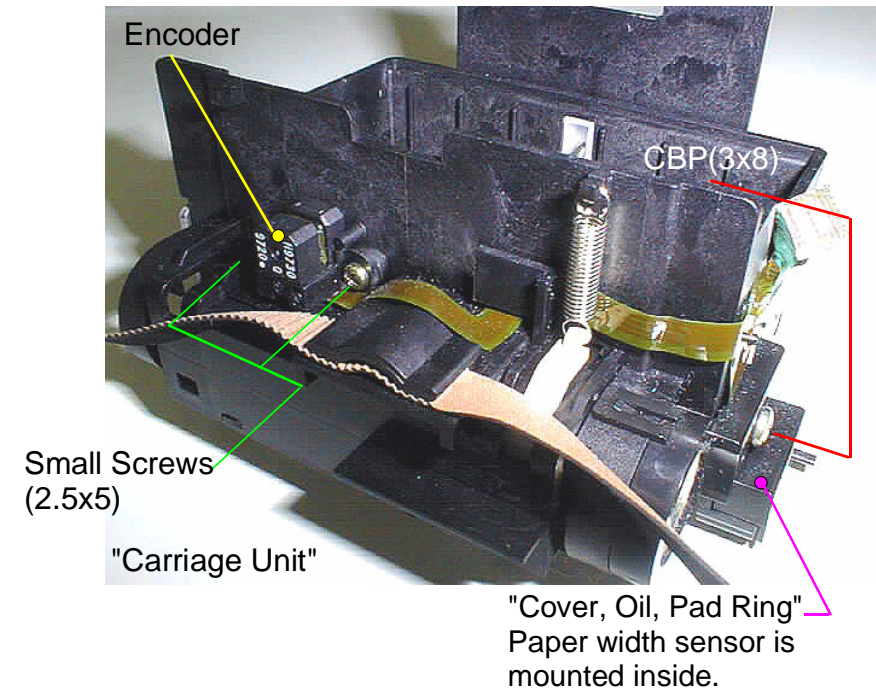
"Cable Assembly, Sensor FPC" Removal
